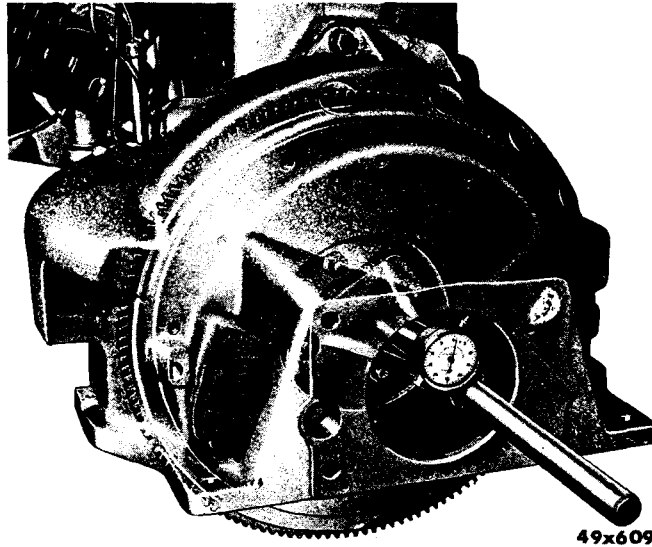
Method of Attaching Fixture C-870 (Flywheel Type Housing Illustrated)
